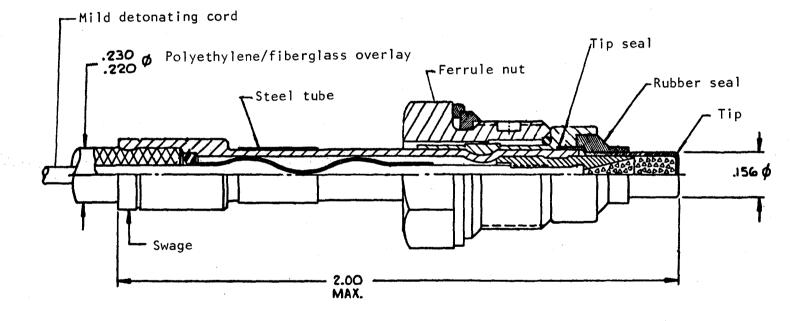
Cross section of B-1 flexible explosive transfer line.
